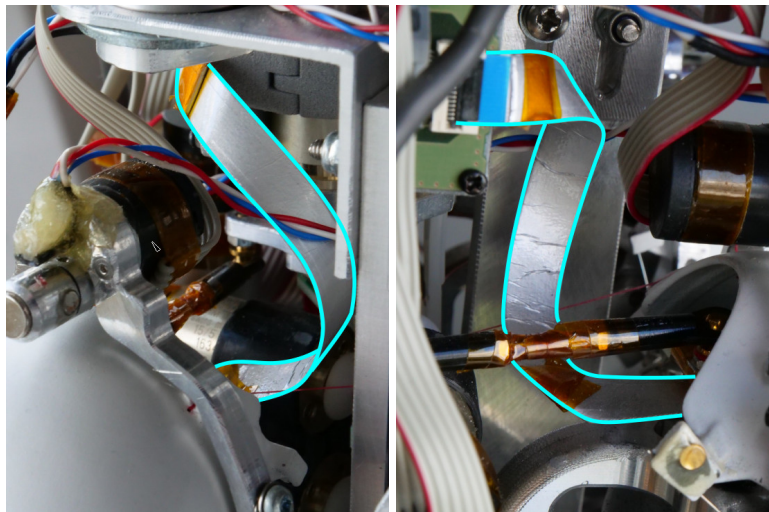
Front- and back view of the camera's flex cable routing inside the Floka robot.
